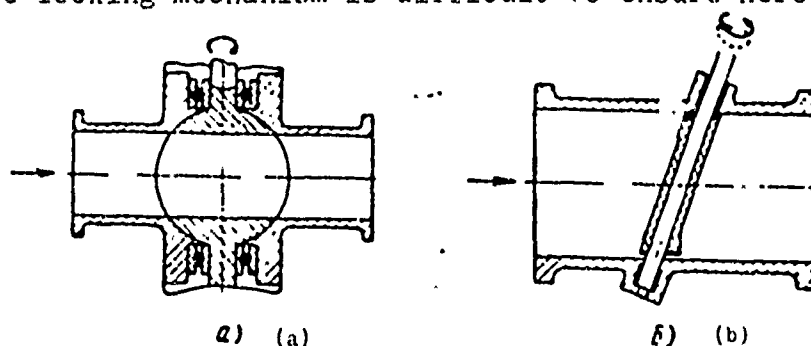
Diagrams of propellant valves: a - with spherical plug; b - throttle-type.
